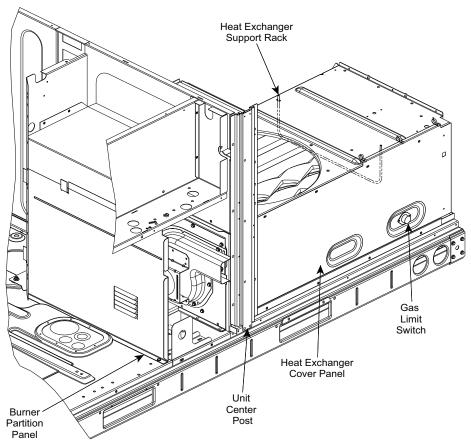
Heat Exchanger Access — Internal Panels, Center Post and HX Rack Locations
